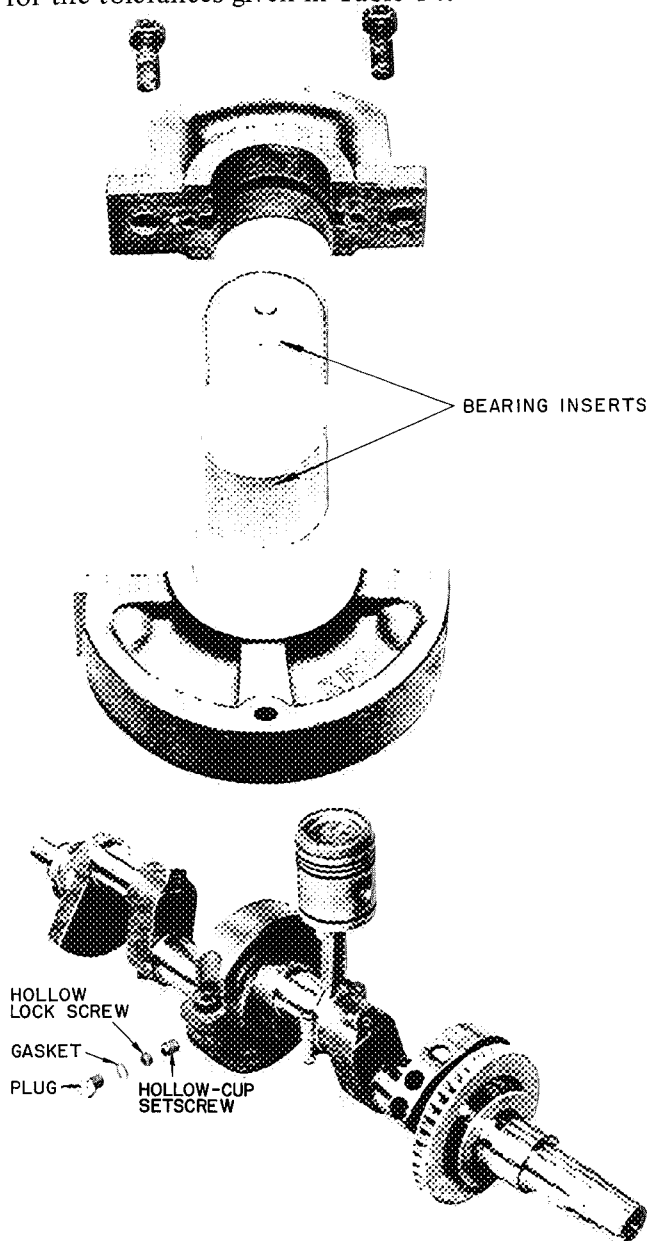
Center Main Bearing (5H120 and 5H126)
